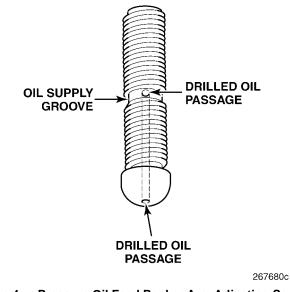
Pressure Oil Feed Rocker Arm Adjusting Screw
